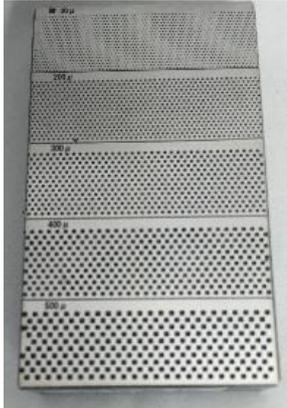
Initial micro-dot pattern drawn by the ink-jet printing onto the surface of AISI420 mold.
